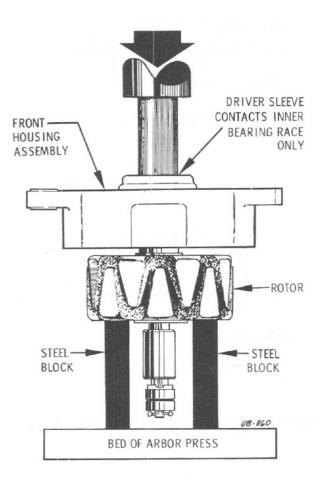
ASSEMBLE FRONT HOUSING TO ROTOR
